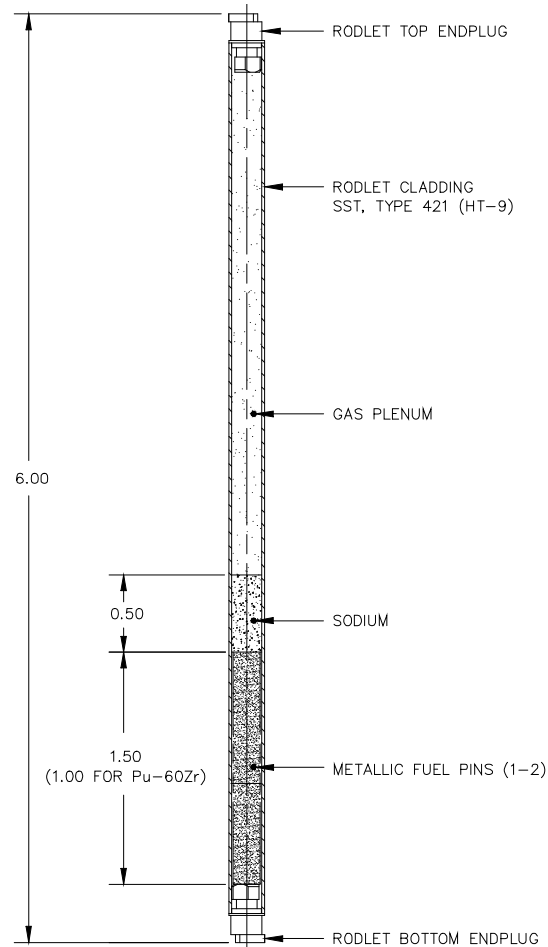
Rodlet assembly axial dimensions for the AFC-2 metallic fuel tests.
